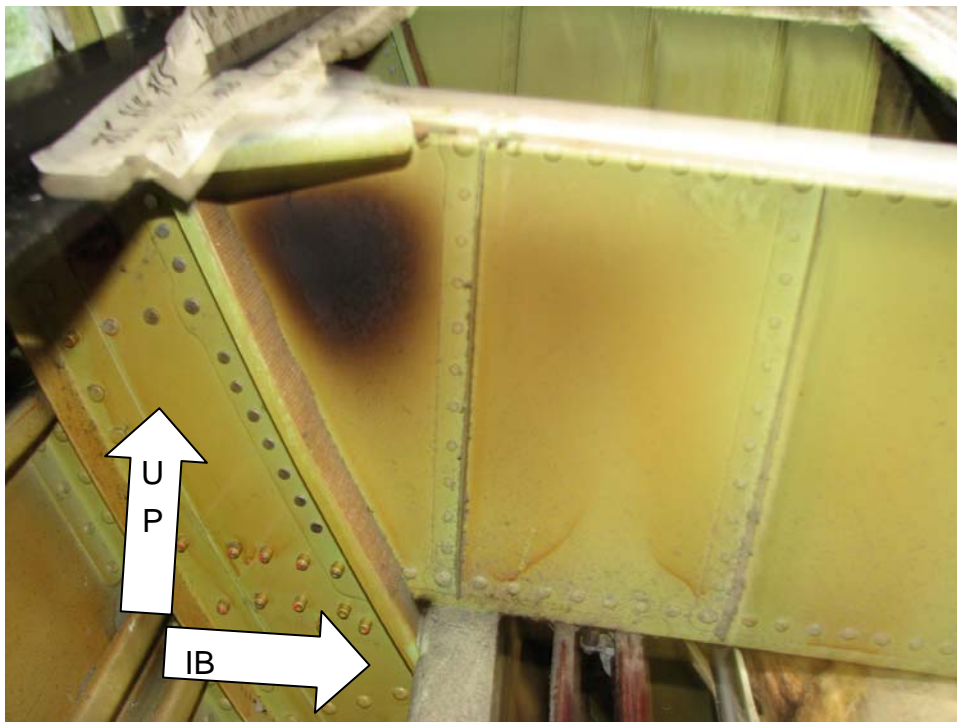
STA 2060 Rear Side of Floor Beam
